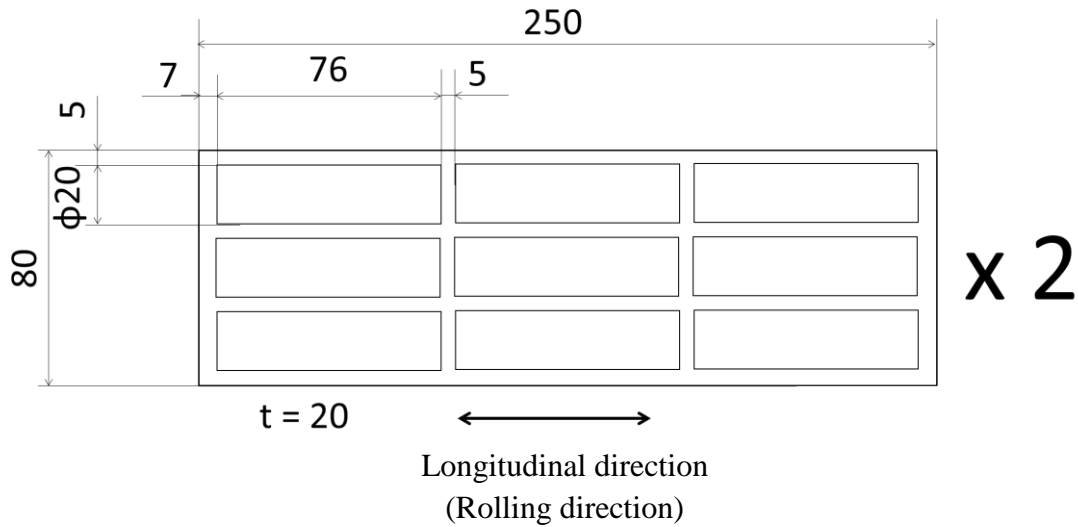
9 Layout drawing of cutting out the specimens from the plate.
